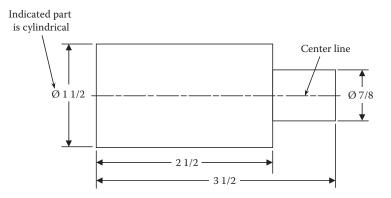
One-view drawing of cylindrical shaft; Ø or DIA indicates that the part is cylindrical. Center line shows that the part is symmetrical.
